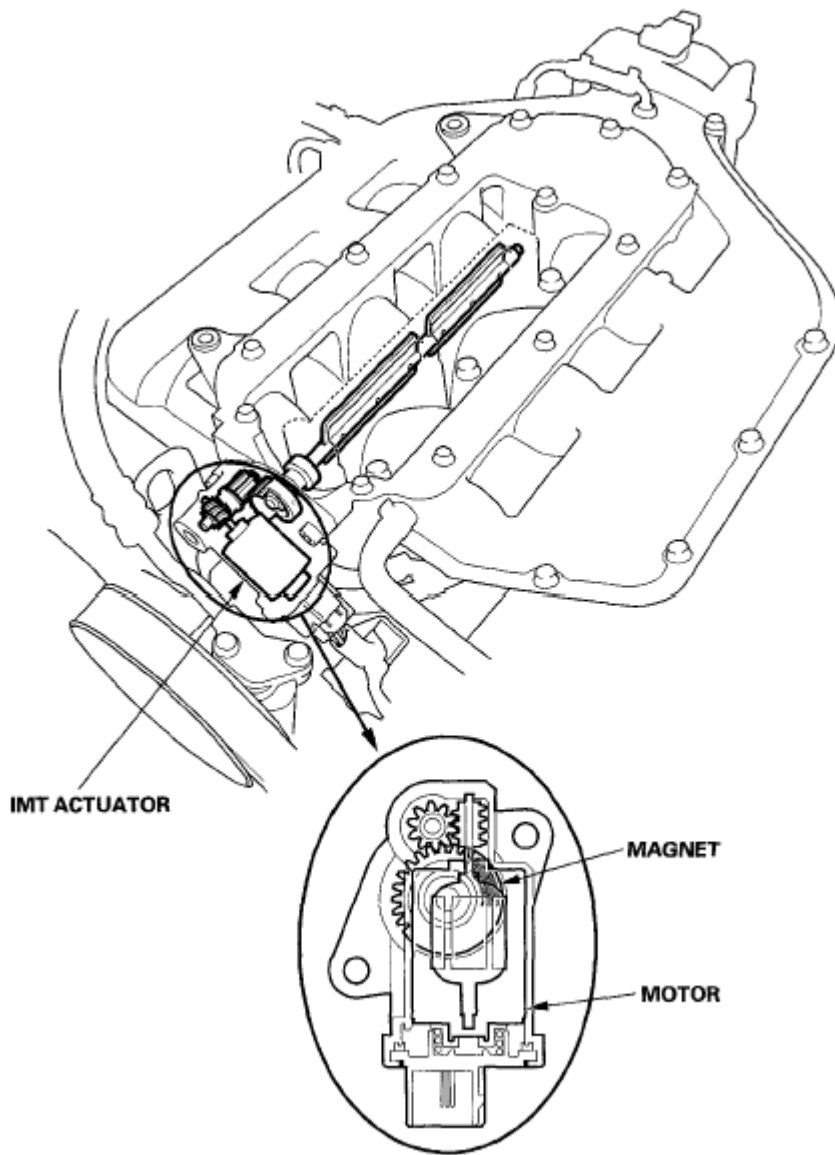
Identifying IMT Actuator, Magnet And Motor
